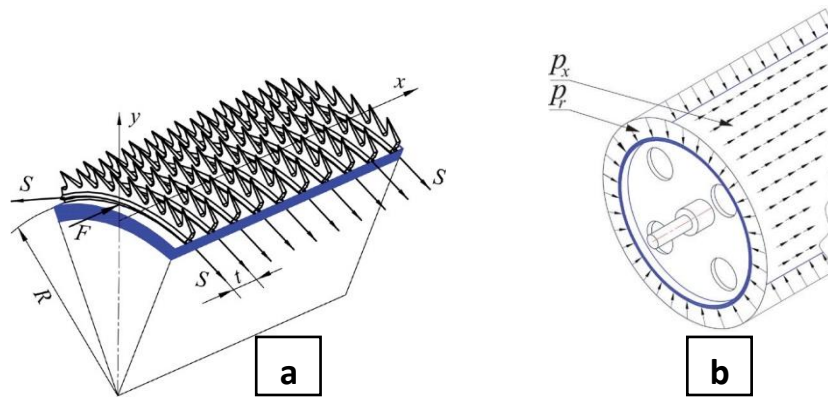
(a) Tension Forces Acting on The Metallic Card Wire Coils. (b) Load Scheme.
